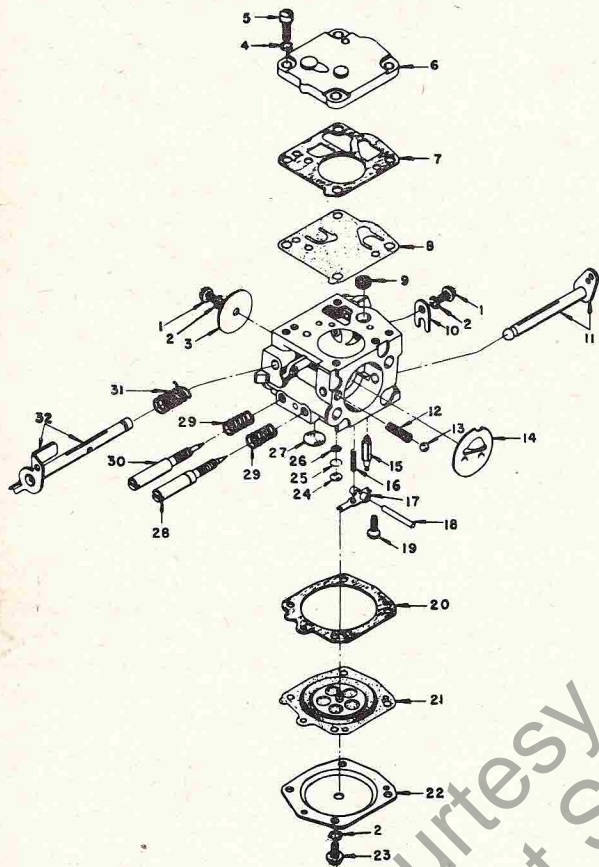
Exploded view of Tillotson series HL carburetor used on models XL-700, XL-800 and XL-850. Refer also to Figs. HL76 through HL80.
